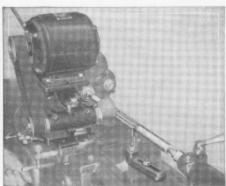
Sharpening a Straight Reamer The electric grinder can be used for sharpen-ing straight reamers, spiral reamers, taper ream-ers, milling cutters, keyseat cutters, etc. This grinder is further illustrated and described in book "How to Run a Lathe."
